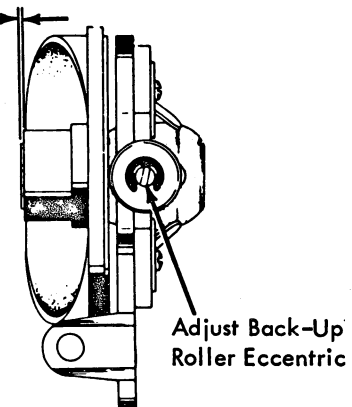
Shift Cam Back-Up Roller Adjustment
